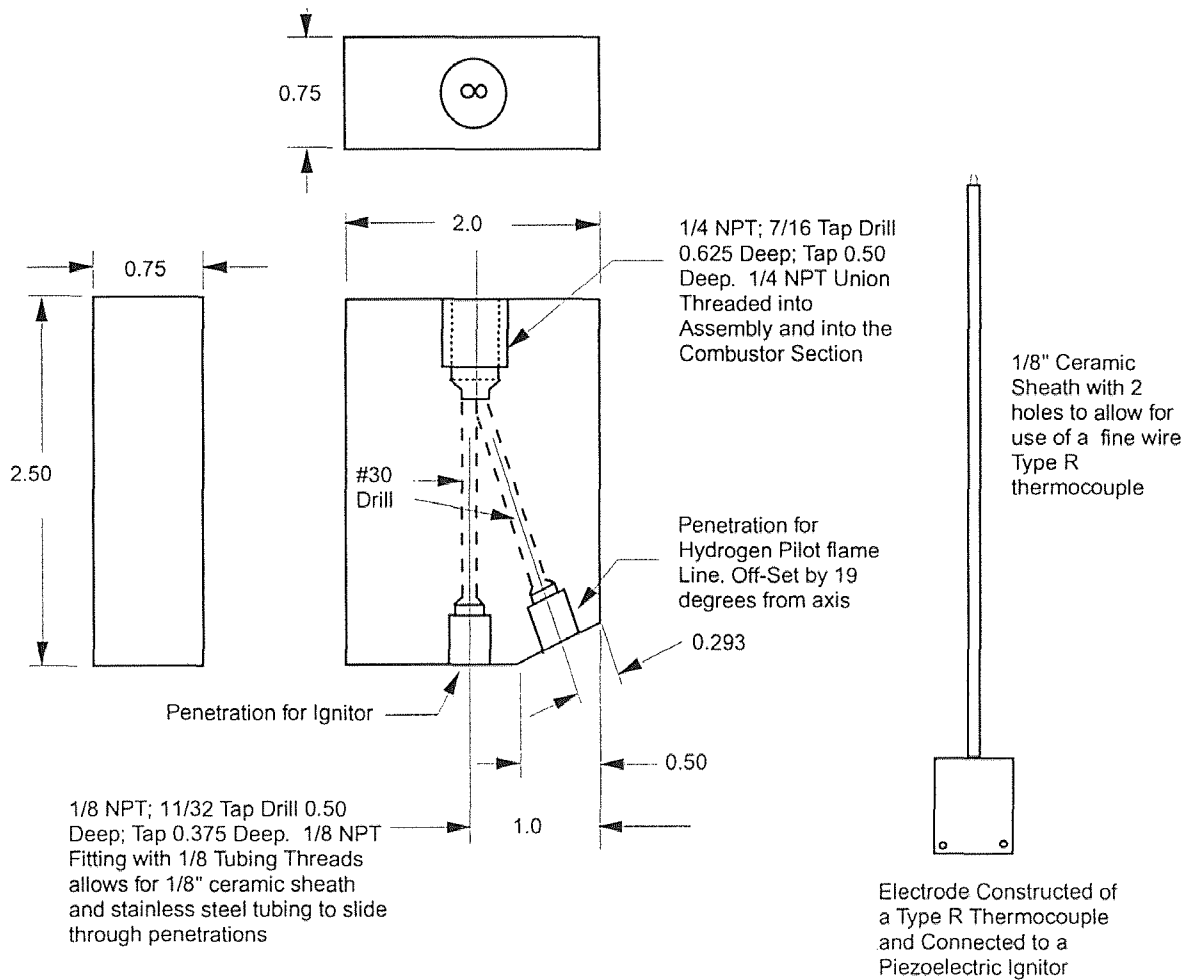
Disassembled View of the Swirled Burner Assembly
